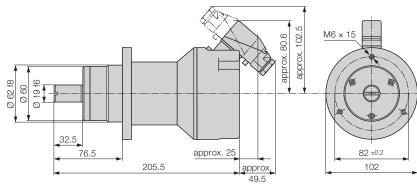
KINAX WT 707 with additional gear and plug connector.
